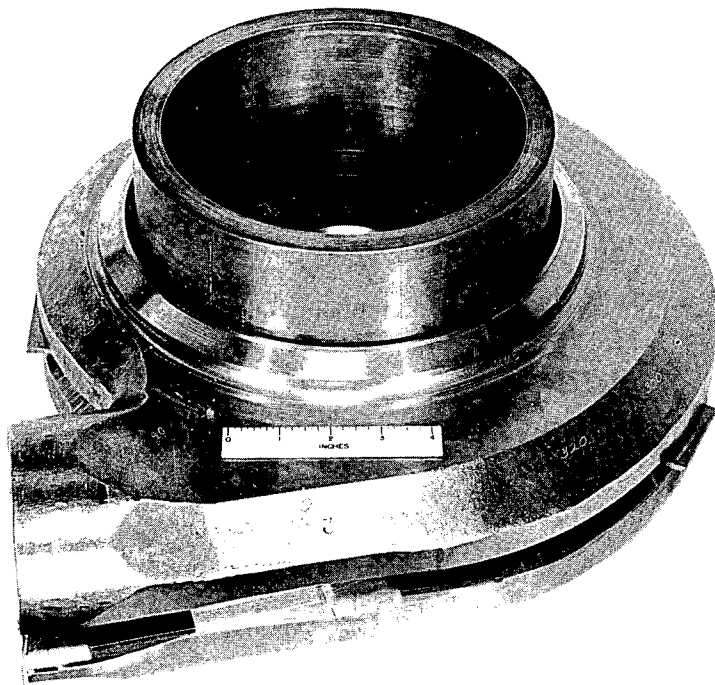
Primary Pump Volute Assembled for Welding.
